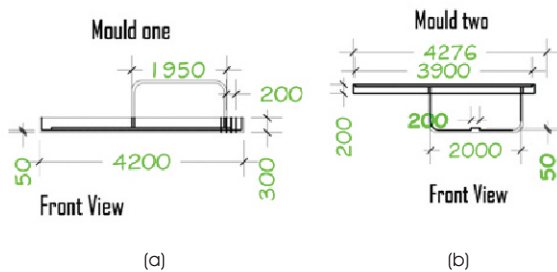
Front View Dimension (a) Mould One, (b) Two Mould
